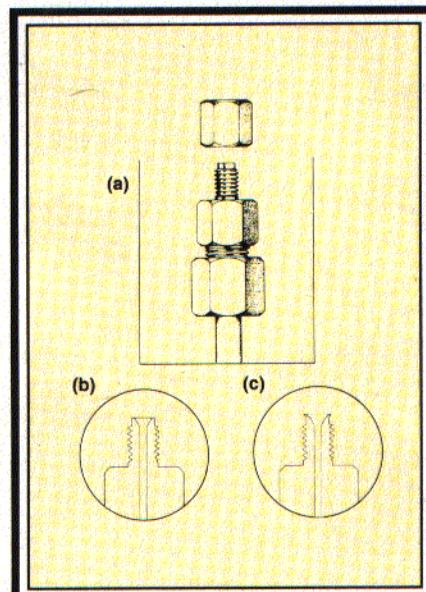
External column endfitting. (a) Exploded diagram, showing nut, ferrule, and tube end about to be inserted into fitting body. (b) Cross section showing new seat. (c) Cross section showing distorted cone resulting from overtightening the fitting.
